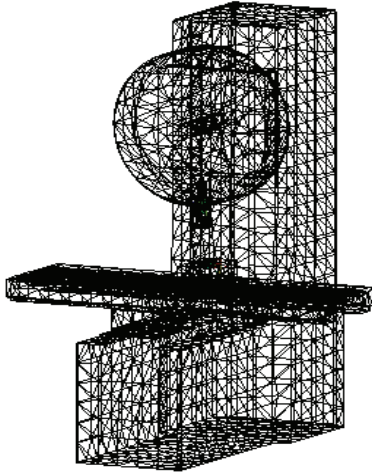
The finite element model of the machine -EMCO PC Mill 155-.
